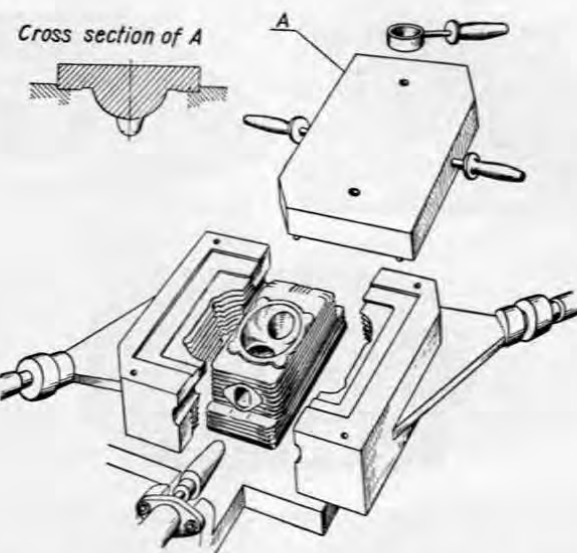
Illustration of casting cylinder heads into iron moulds.
